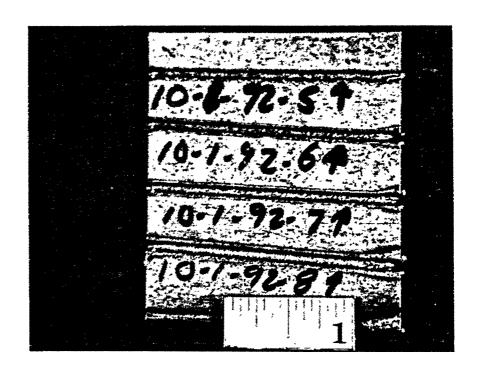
Cold Rolled Steel 0.125 in. Thick Samples 10-1-92-5, 6, 7, 8
